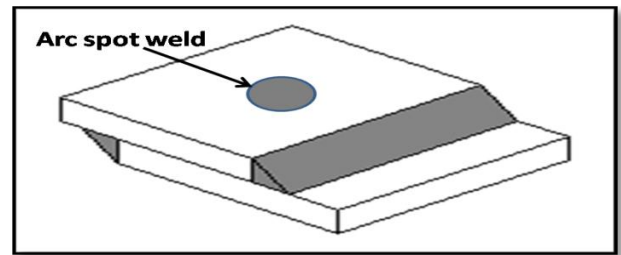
Arc spot penetrate weld / double fillet welds mixed joint
